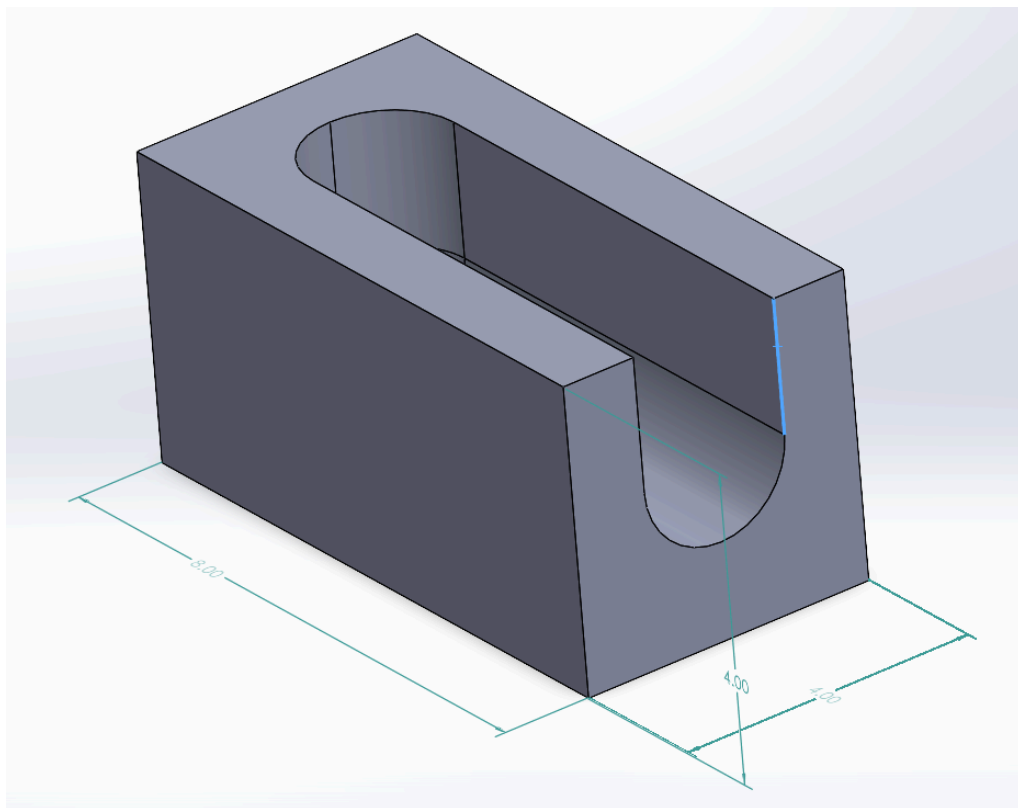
CAD model for the bottom piece of the compression mold (dimensions in cm).
